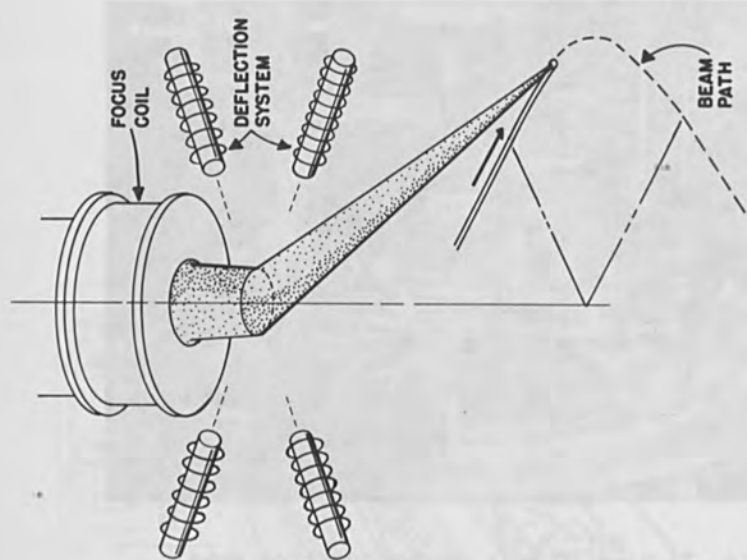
Electromagnetic Deflection of Electron Beam to follow Complex Weld Joint Path.
